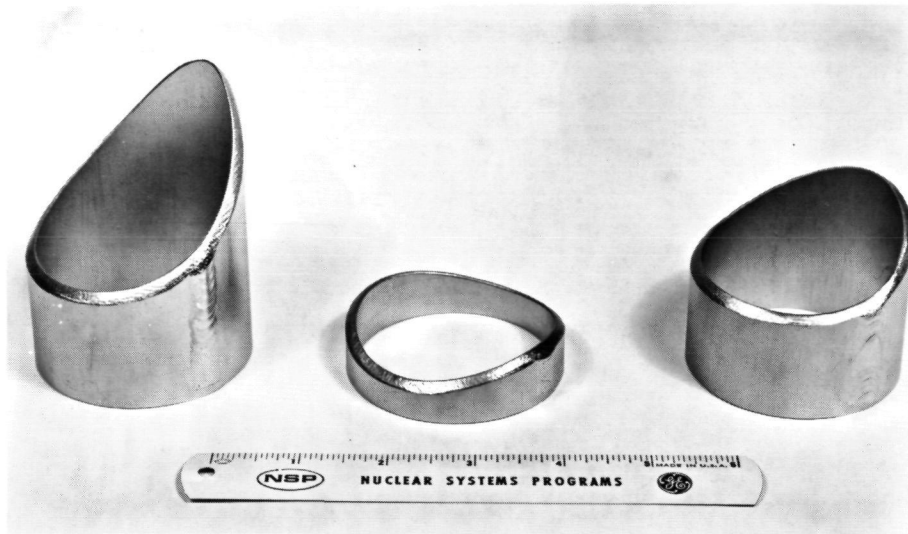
Typical Manifold Support Tubes. (P69-5-17)
